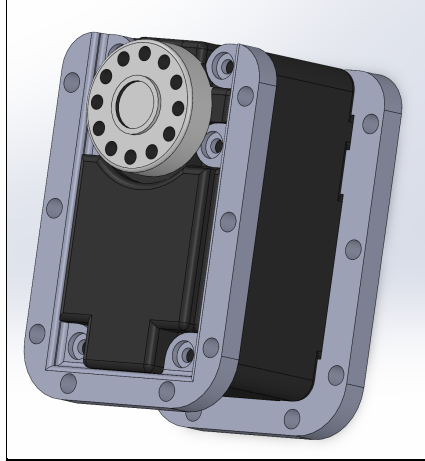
HerkuleX Motor CAD with the motor adapter prints attached
